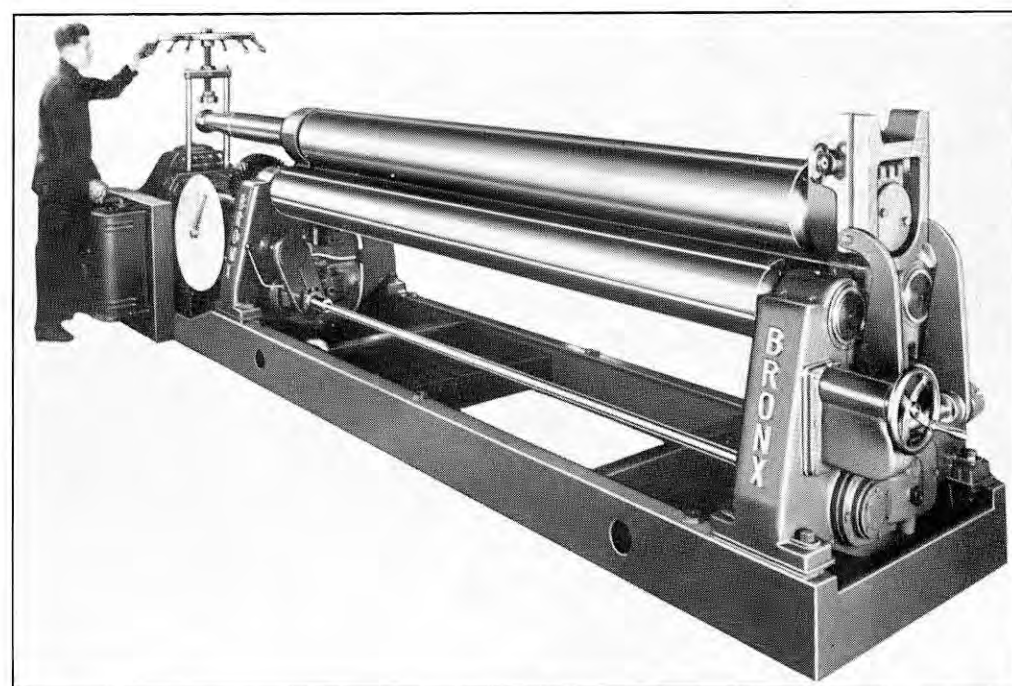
THREE-ROLL PLATE-BENDING MACHINE; BRONX ENGINEERING CO., LTD.
